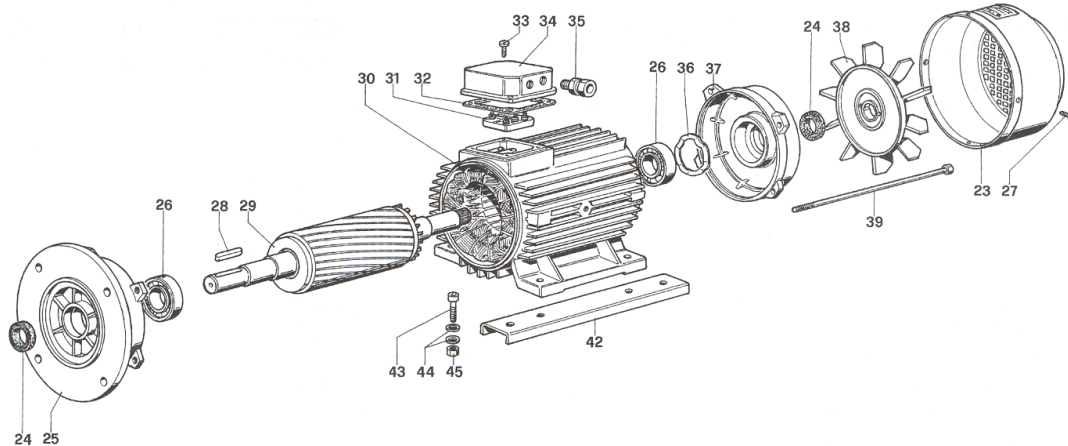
Exploded View of the Pedestal Polyphase Induction Motor
